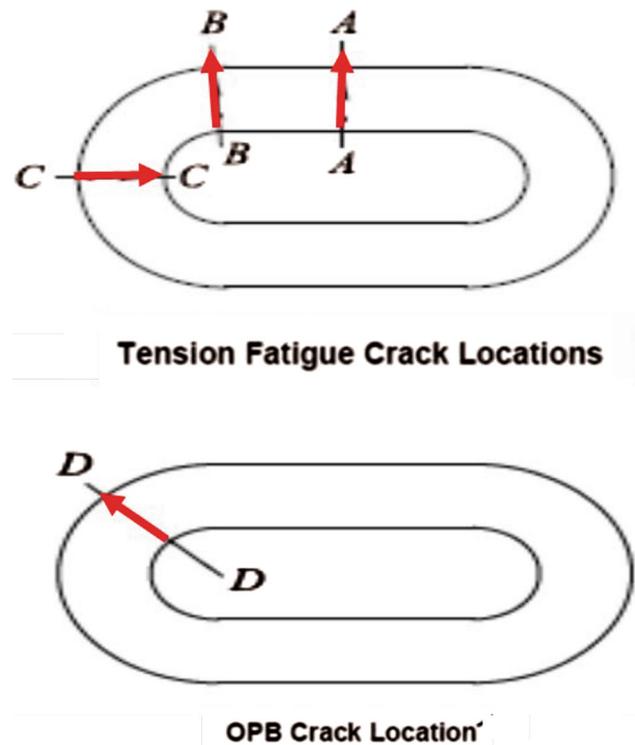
Crack locations for Tension vs OPB Loading [10]
